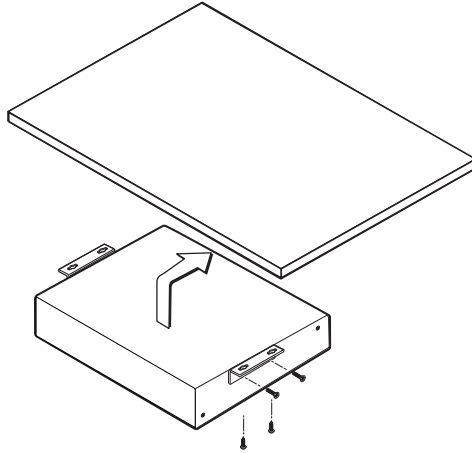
Mounting the unit on a standard rack shelf
